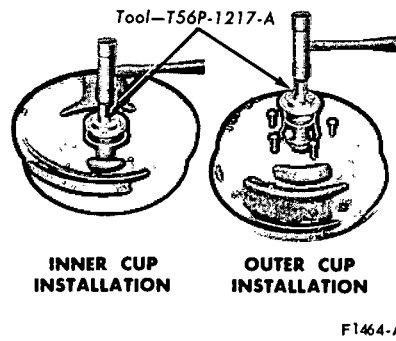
Installing Front Wheel Bearing Cups—Drum
